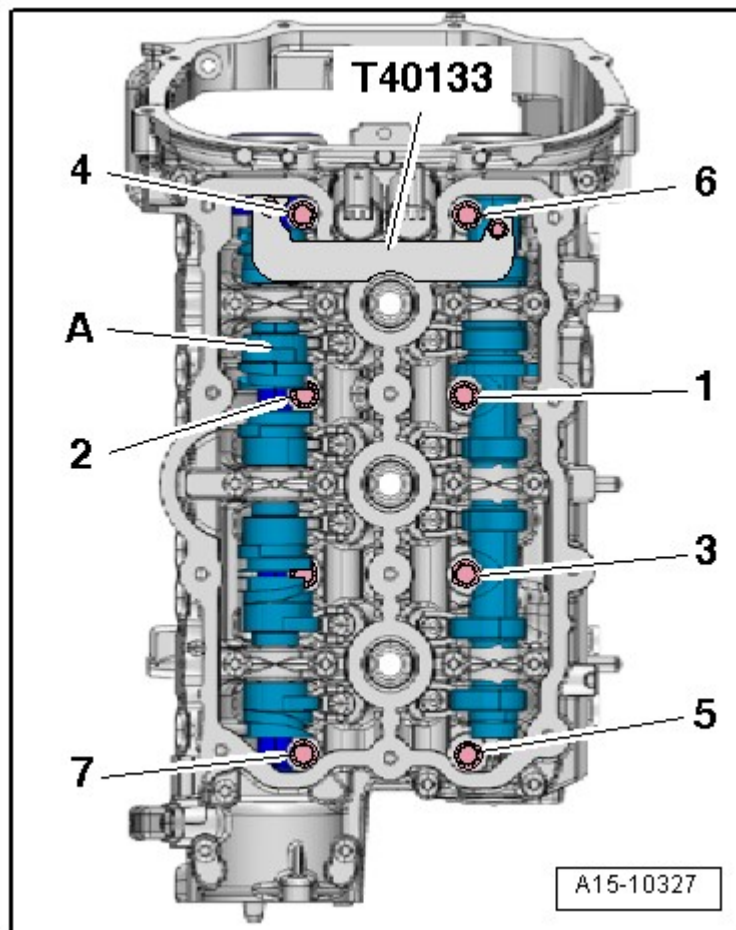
Identifying Unloaded Camshaft Slider & Bolts (Left Cylinder Head)
